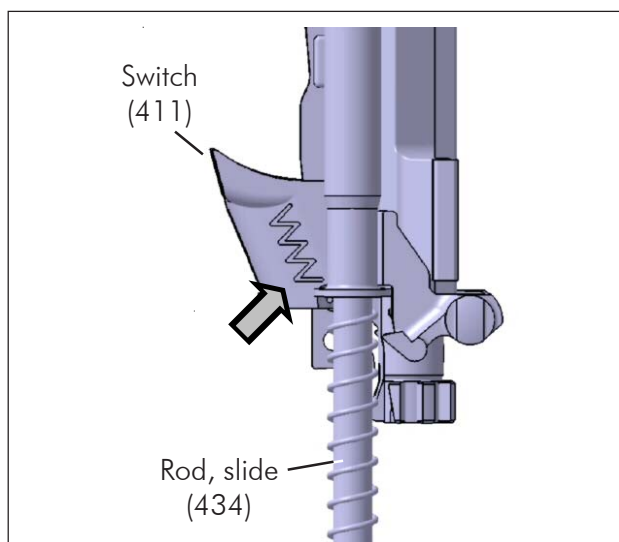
n - The face illustrated with a spring in front of the rod, slide (434)
